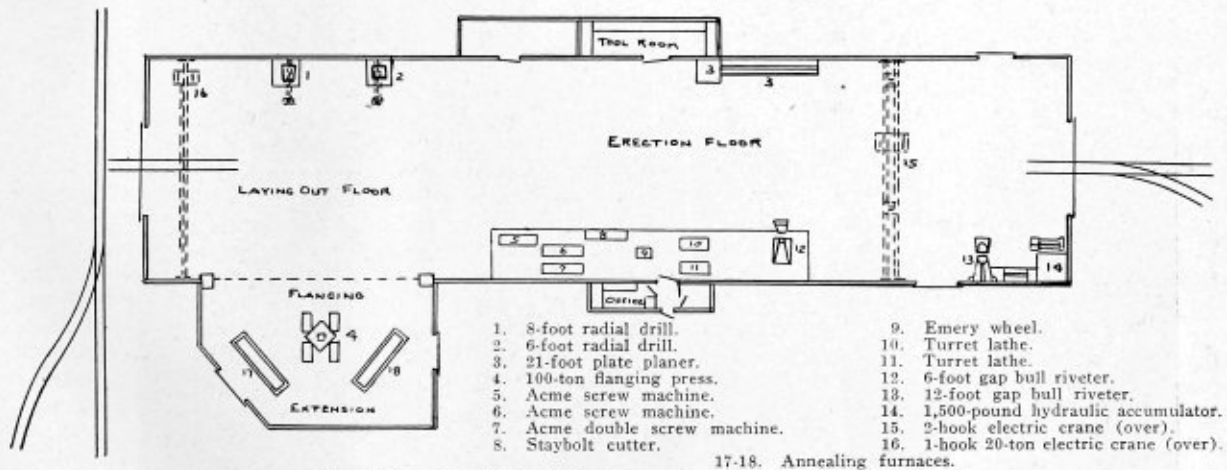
Floor Plan of the Main Boiler Shop at the Staten Island Shipbuilding Company
